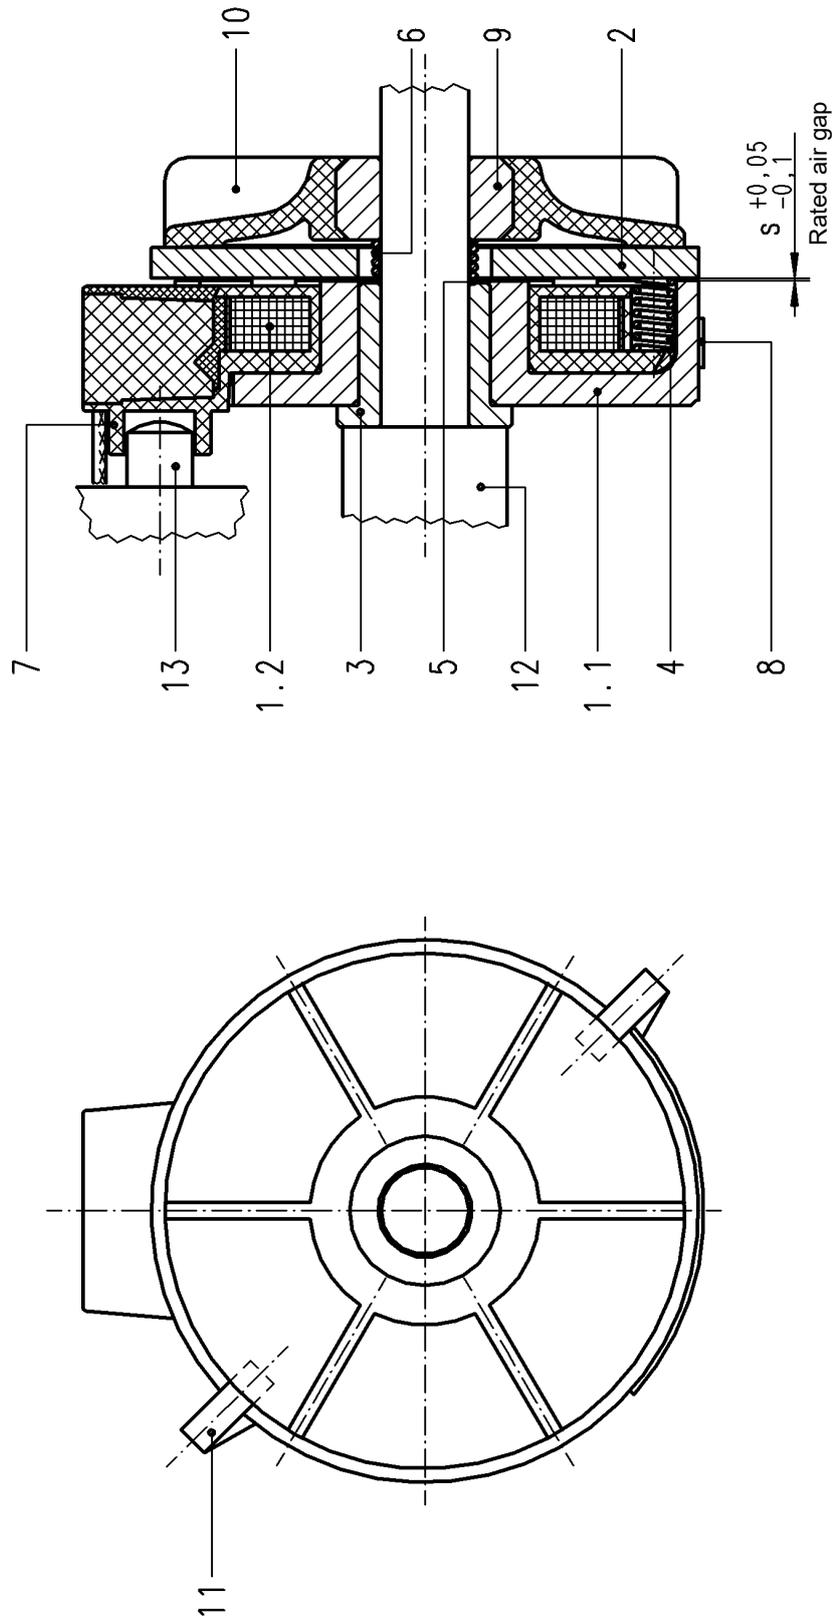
/1: Spring-applied single-face brake 76 13105C0.
